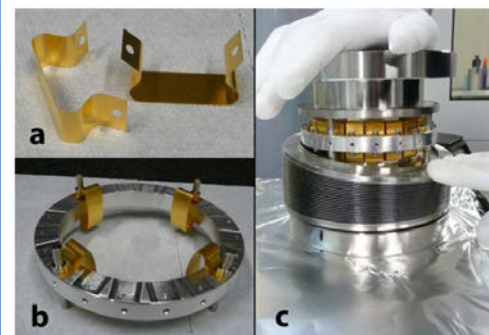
View of gold coated strip (a), supporting annular ring (b), RF shielded bellows assembly (c).
